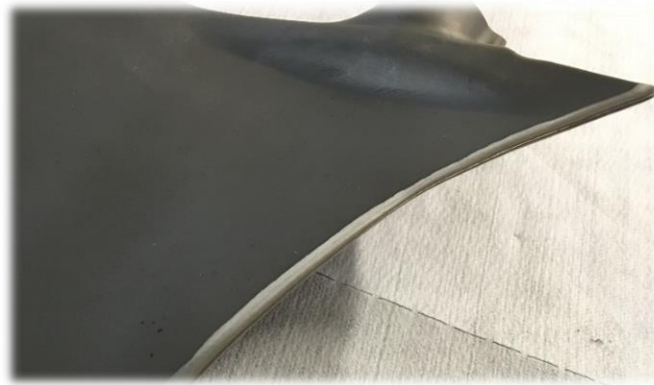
An example of the desired blend between the machined edge and the existing surface
